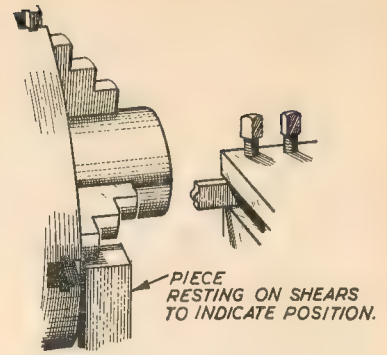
The lathe being stationary, the saddle is worked transversely to obtain grooves—the tool being clamped on its side
